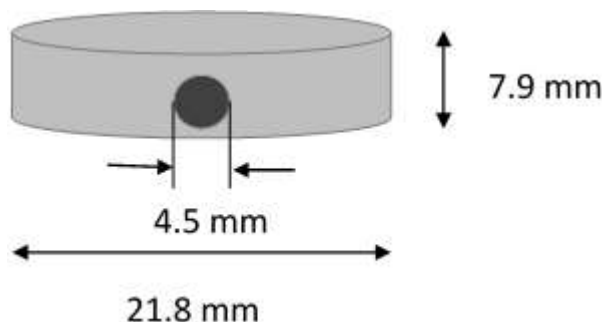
Schematic drawing of a sample Ti6Al7Nb disc indicating the value of its diameter, thickness and diameter of threaded hole.
